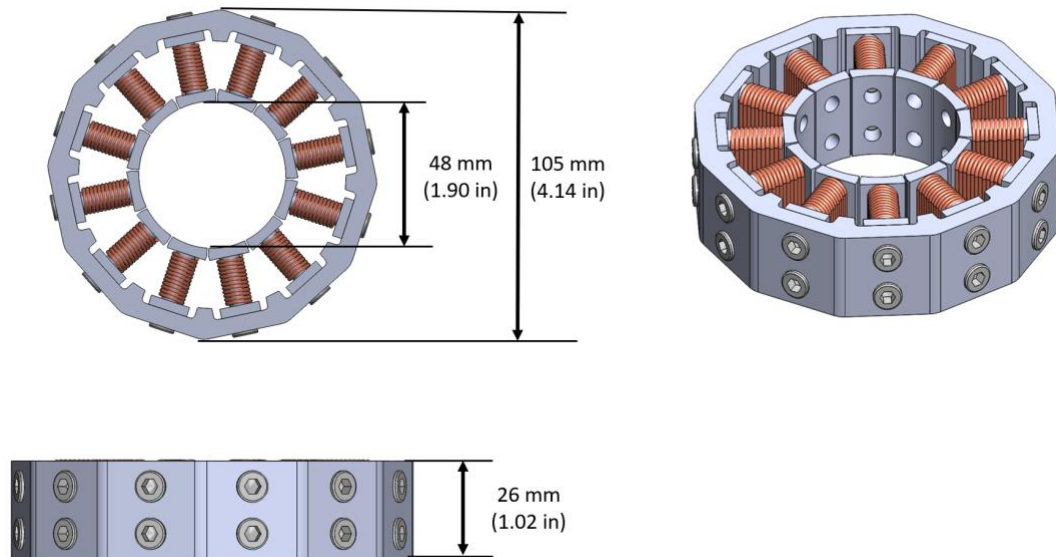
Images of the CAD model showing top, front, and orthogonal views of the final stator assembly design with key dimensions highlighted.
